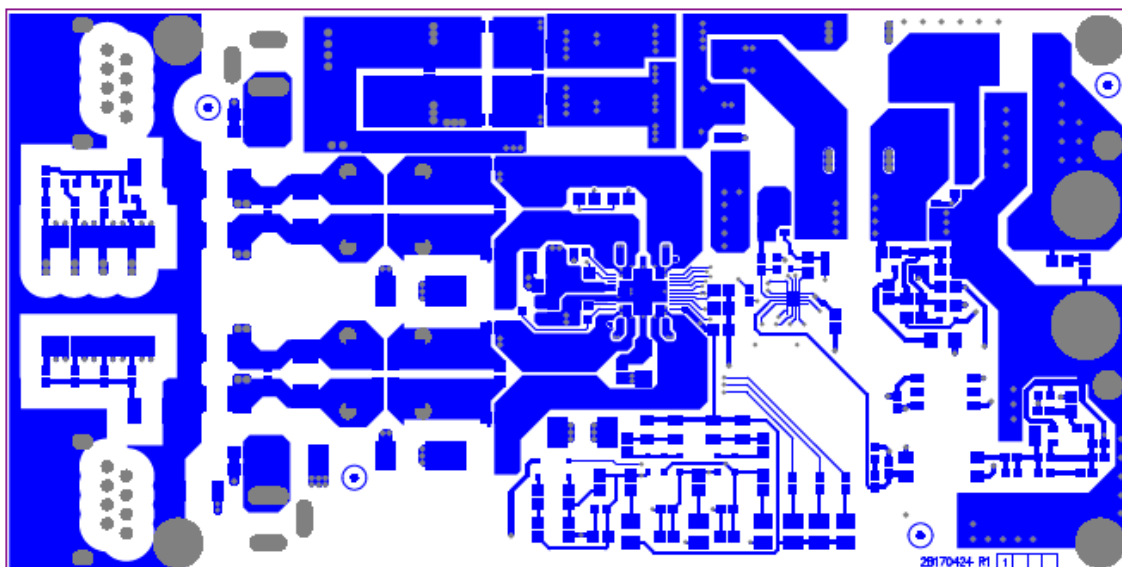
STEVAL-POE002V1 evaluation board: PCB layer 2
